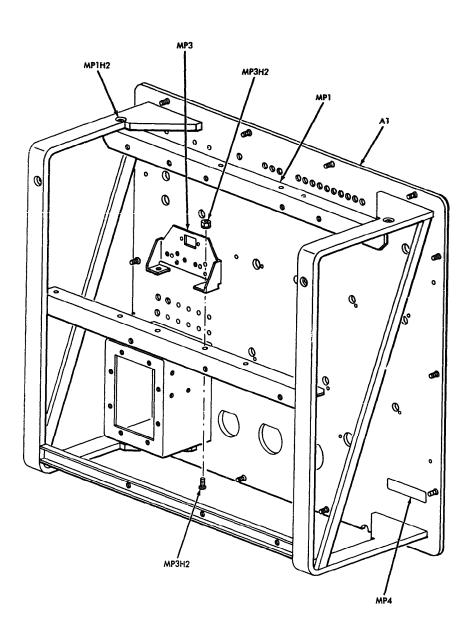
(3). Power supply assembly 1A3A9, location of pad (sheet 3 of 8).
